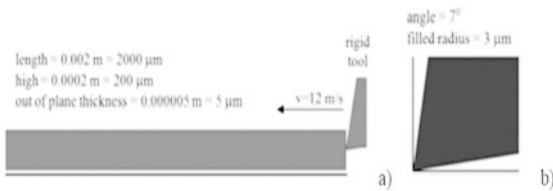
a) Configuration of the High Speed Machining; b) Geometry of the rigid tool
